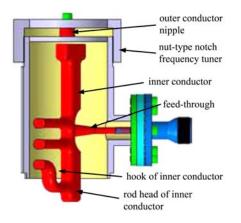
A cutaway of a 3-D PEFP HOM coupler.
